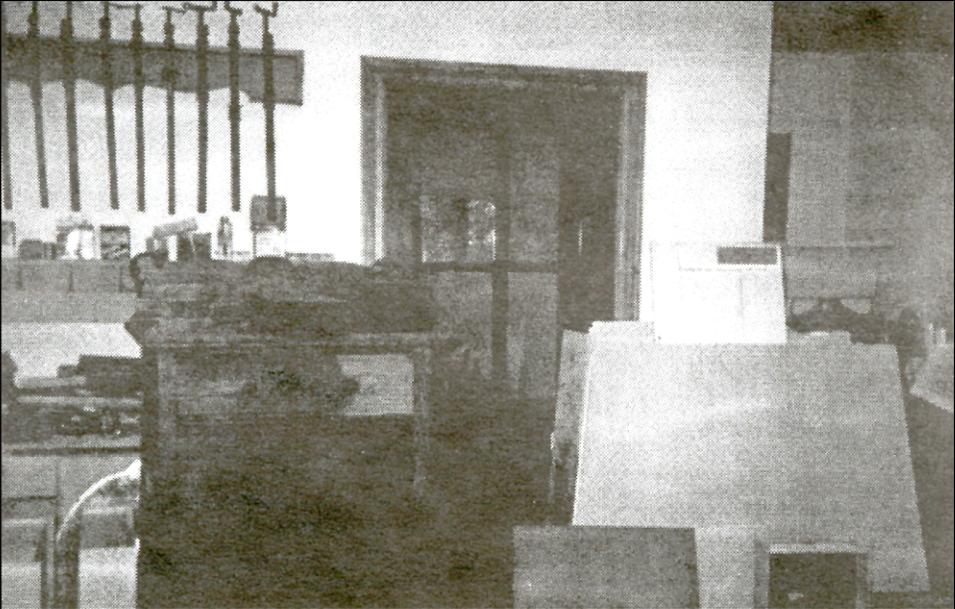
The Gaudry Workshop – Ground Floor Work Area
